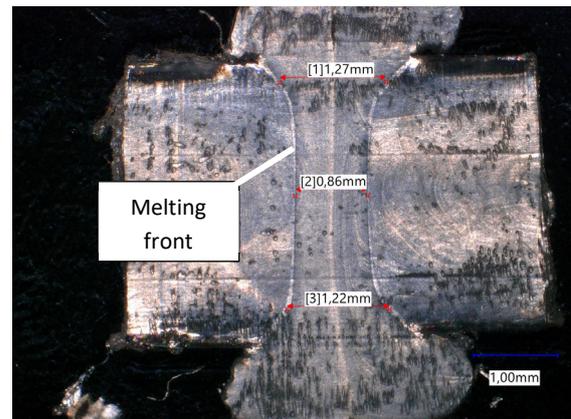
Microtome section of a weld seam under a light microscope.
